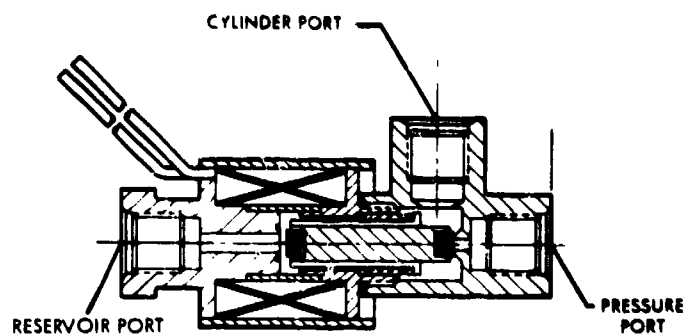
Solenoid-Actuated Poppet-Type Three-Way Valve
